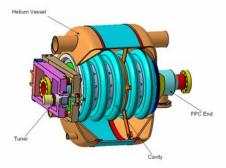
An assembly of a PEFP low-beta cavity, a tuner and a helium vessel.
